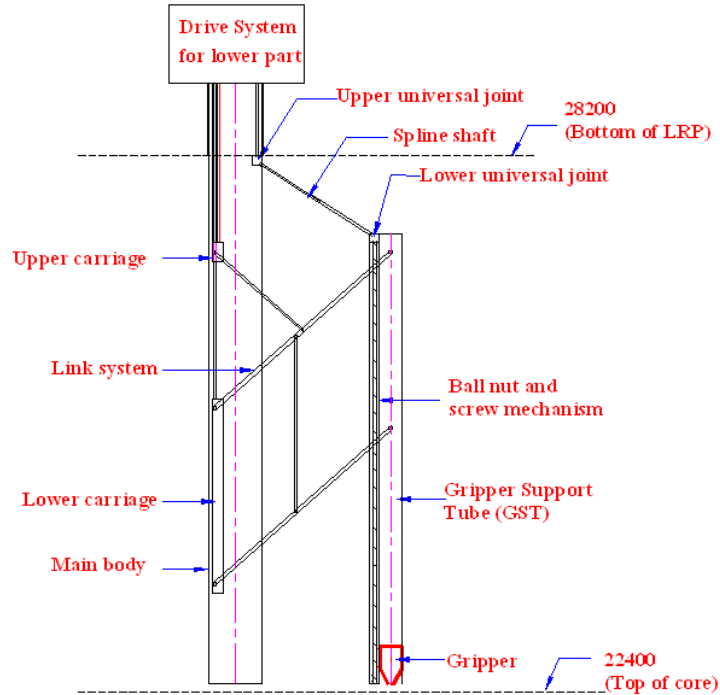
Schematic diagram of collapsible type of in-vessel handling machine
